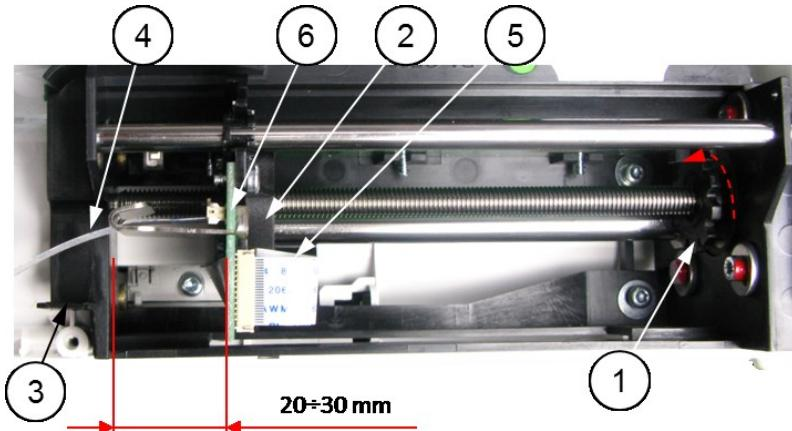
Position of the Drive mechanism direct board for removal/installation
